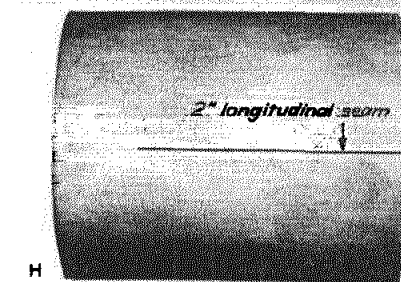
Tensile fatigue fracture that developed independently of major longitudinal defect in opposite side of bar.
